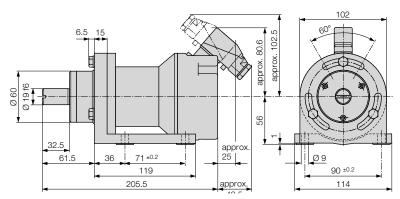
KINAX WT 707 with additional gear, plug connector and foot.
